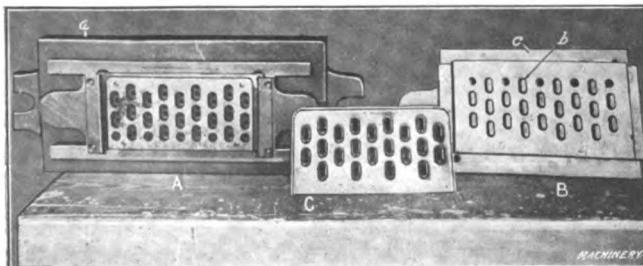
Punch and Die for drawing up Edges of Perforations in Rear Guide Plates
